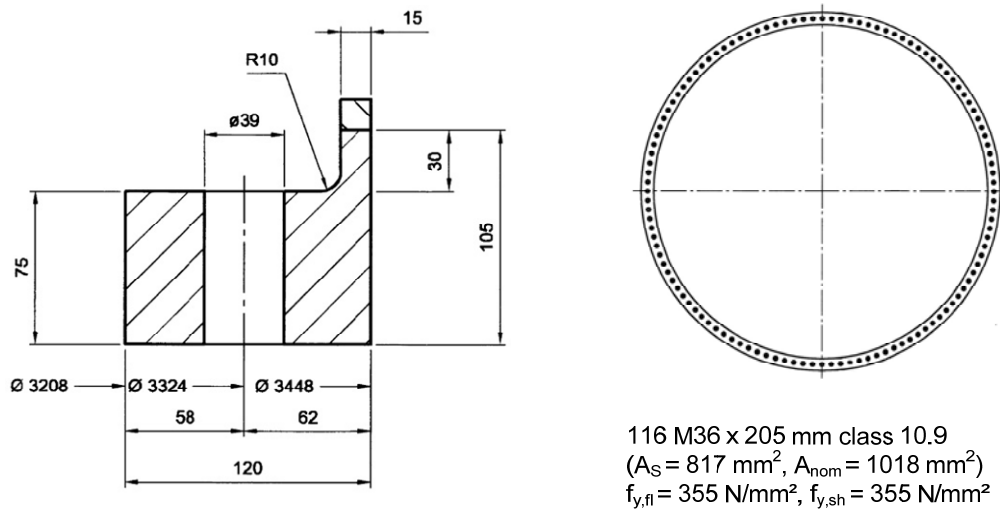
Flange 2 - Dimensions and material properties of upper flange in tower joint 2
